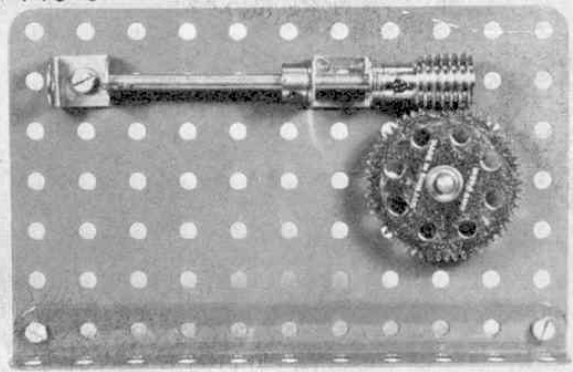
A Worm drive, considered to be the final development of a helical drive.
